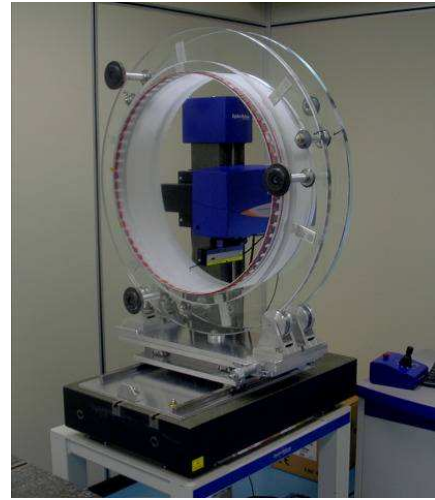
Shell integrated in the SSS jig and positioned horizontally on the metrology machine by means of a suitable mechanical interface developed for alignment purposes.
